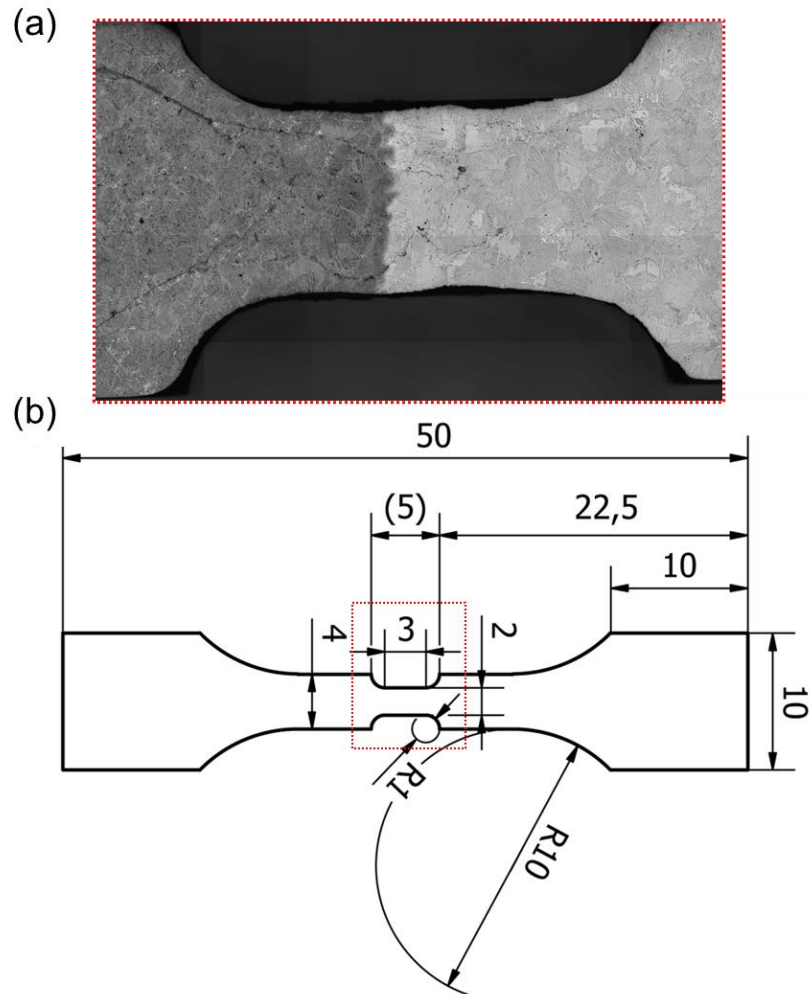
(a) Light micrograph of the bond in the DIC tensile specimen after etching it with HF. (b) Technical draw of the DIC tensile specimen dimensions.
